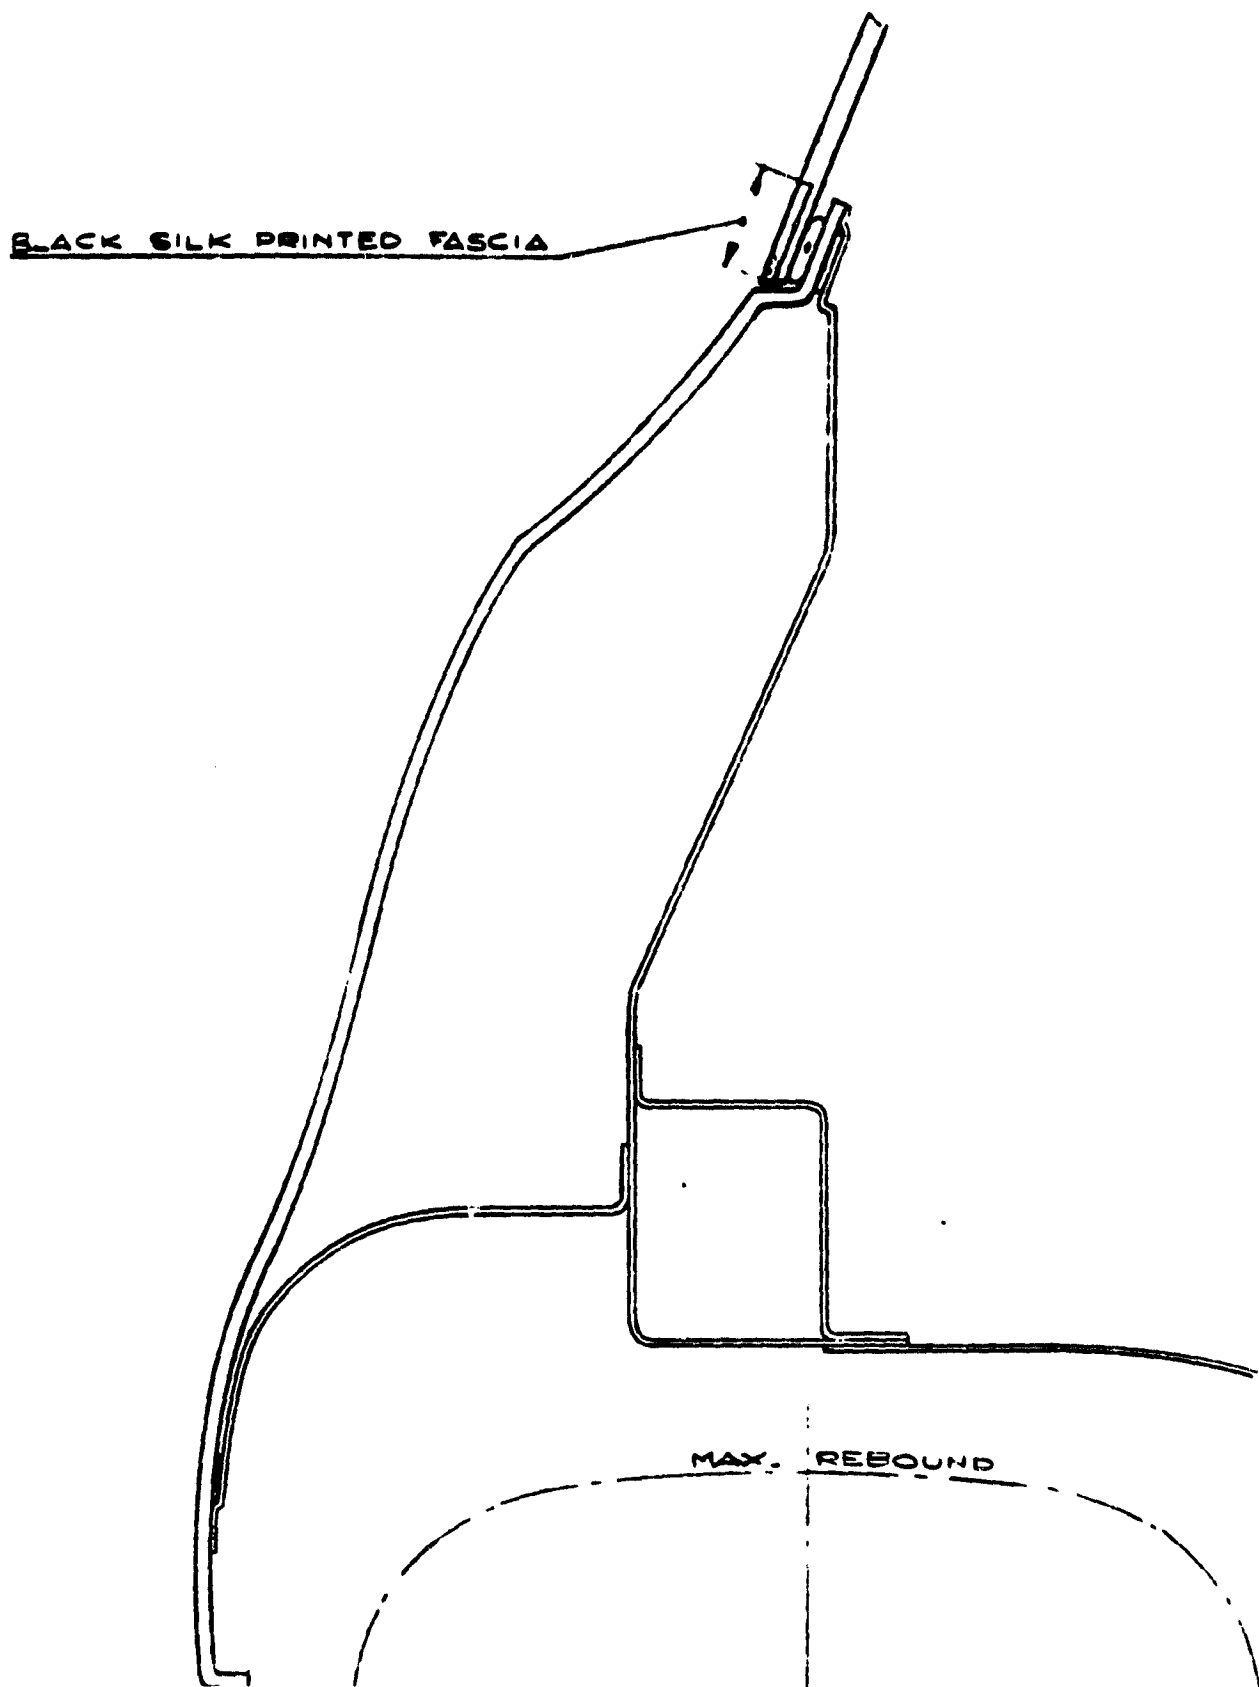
REAR WING SECTION ON REAR WHEEL CENTER LINE
